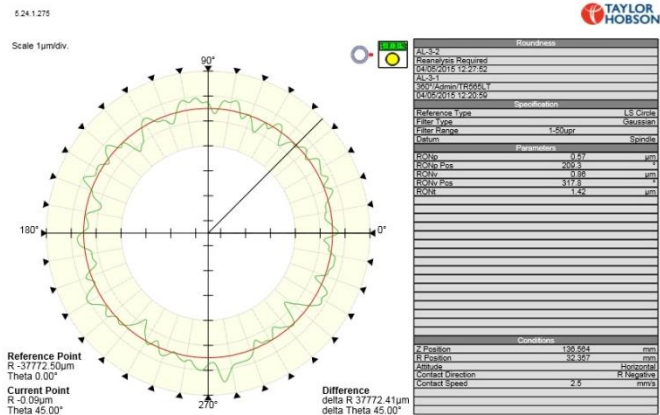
Roundness Profile of SS1 on Machine Tool A
